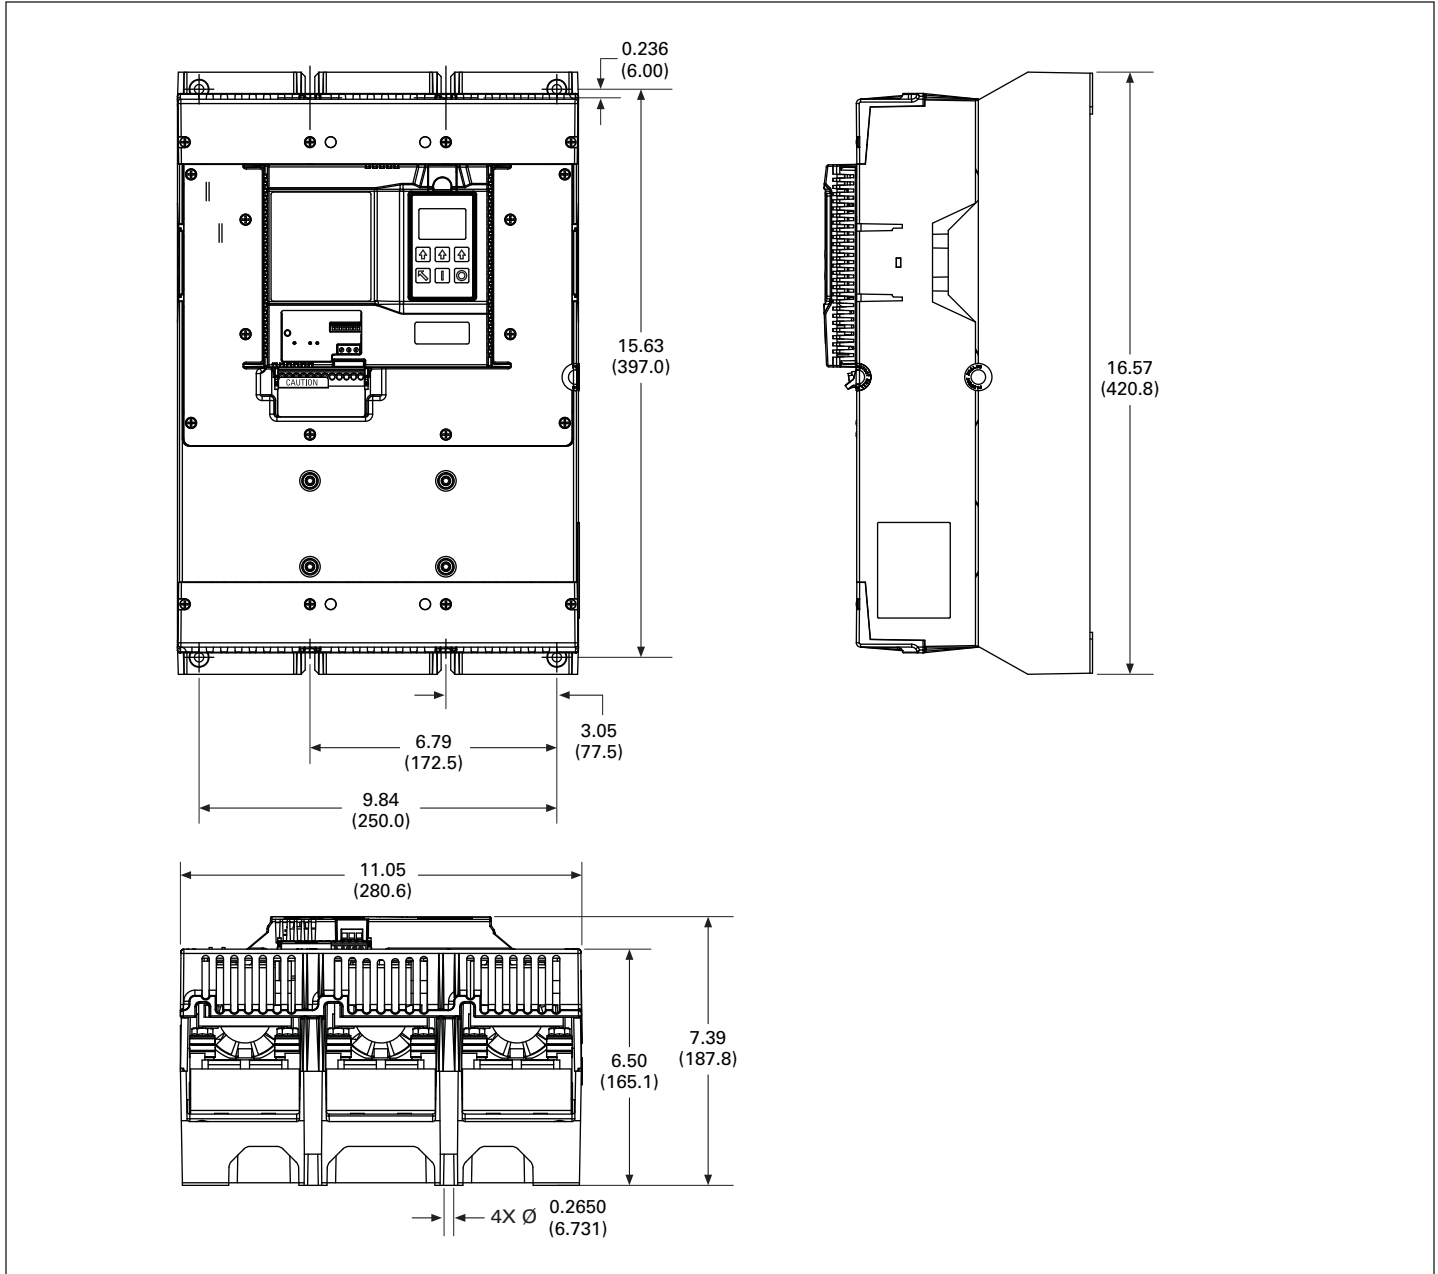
V-Frame (290 mm) S811+ Approximate Dimensions in Inches (mm)
